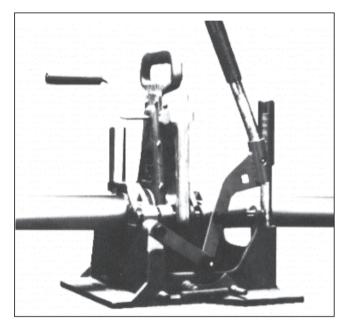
Typical Butt Fusion Machine for Smaller Diameter Pipe (Butt Fusion machines are available to fuse pipe up to 65 inches in diameter)
